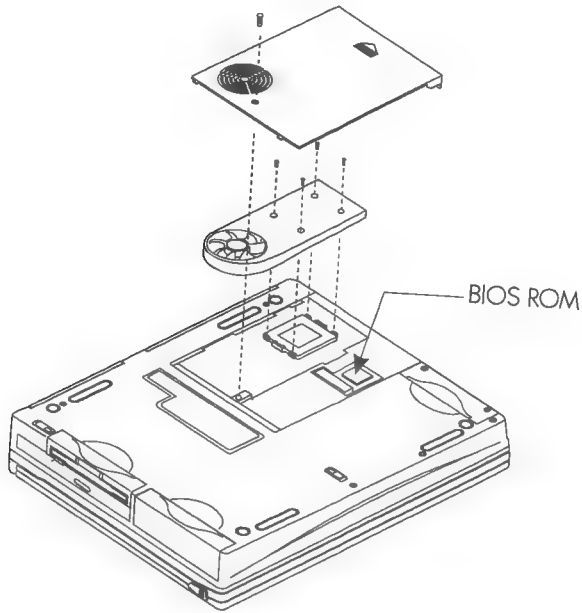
Removing the Heat Sink (Socket 7 type)
